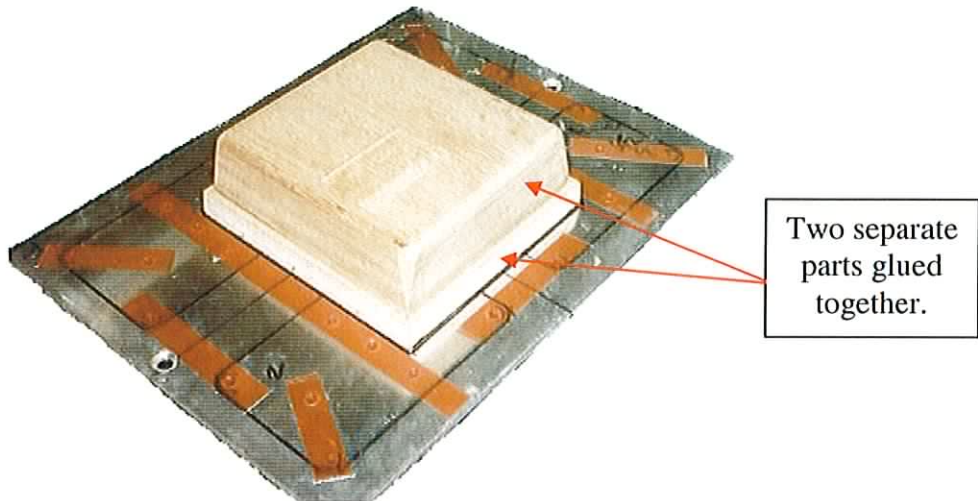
Photo of the Final Vacuum Formed Housing.
